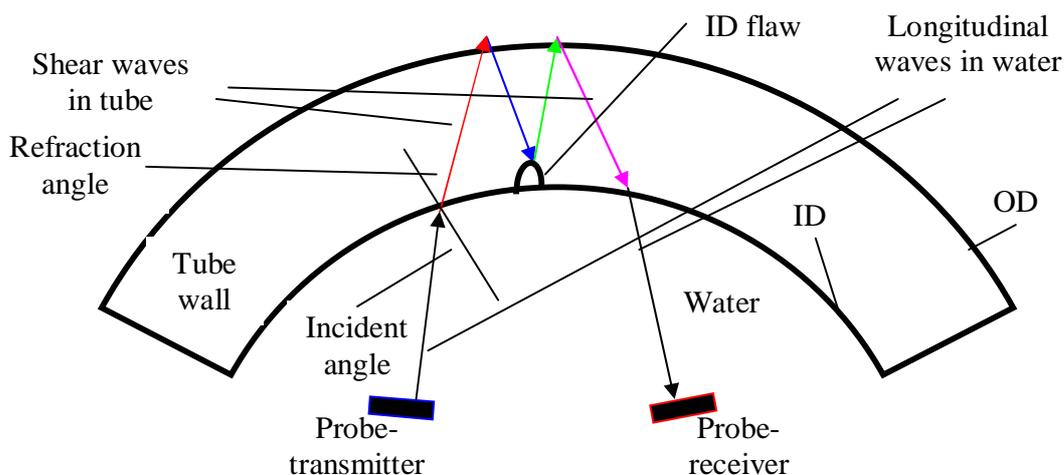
Schematic of the circumferential shear wave PC technique for tube inspection.
